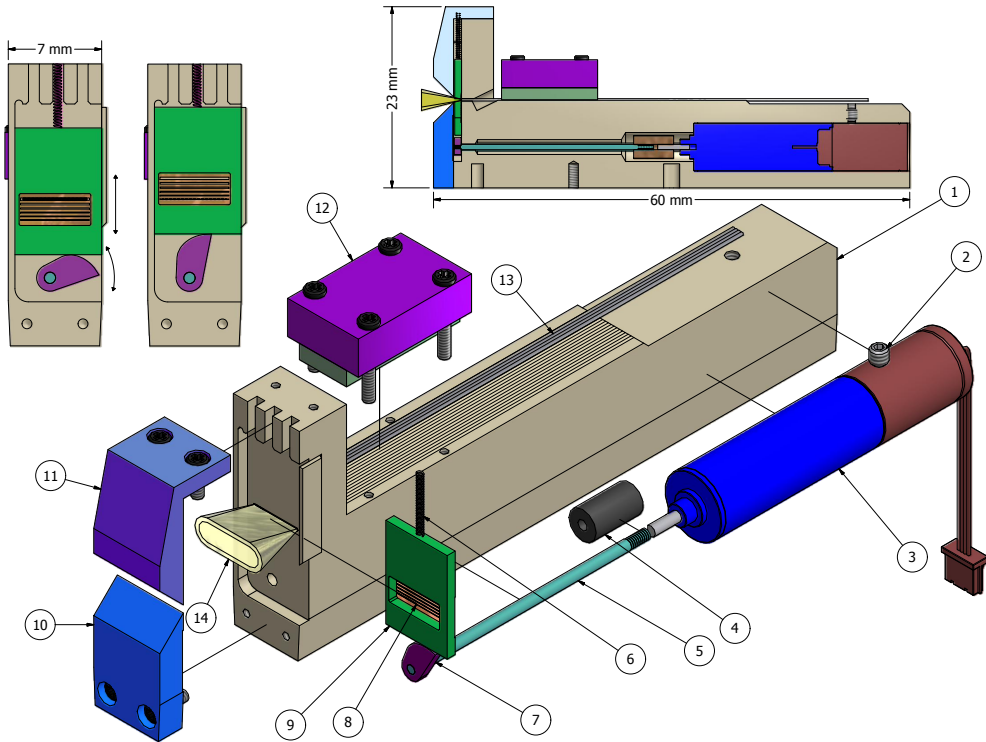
A CAD rendering of the M2FS fiber slit mechanism. The components are as follows and are described in §2.3.1: 1) The base; 2) motor set-screw; 3) step motor and integrated gear head; 4) brass shaft coupling; 5) 1 mm driveshaft; 6) coupling; 7) preload spring; 8) constant-displacement cam; 9) slit carriage; 10) lower clamp; 11) upper clamp; 12) fiber clamp with foam bottom; 13) three of the sixteen sheathed fibers. Finally (14) is an example of a composite $f/2$ and $f/3.2$ beam from the 16 fibers. Screws are self-evident.
